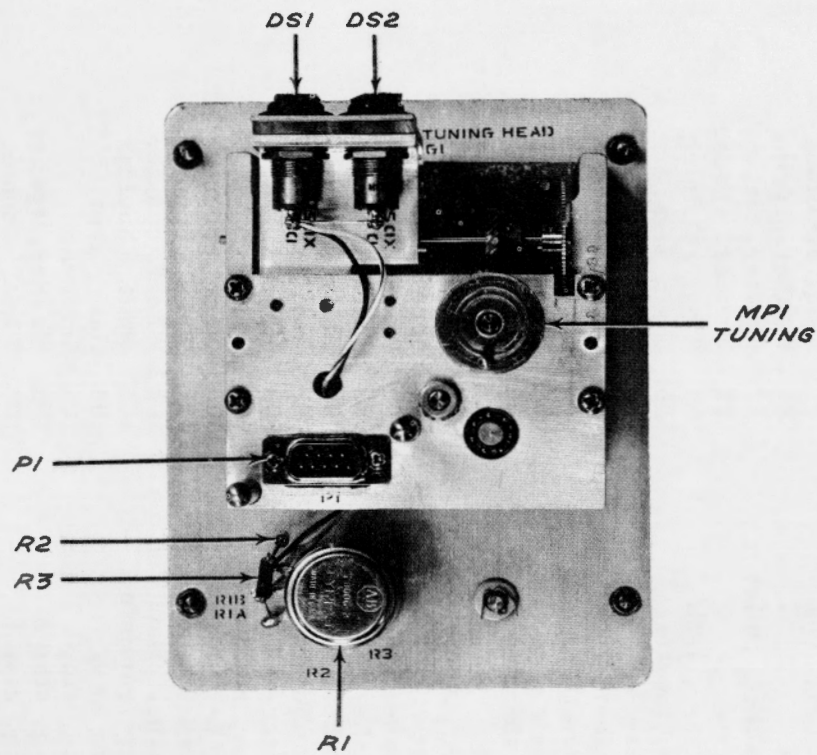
Secondary Tuning Assembly A1A16, Parts Location
